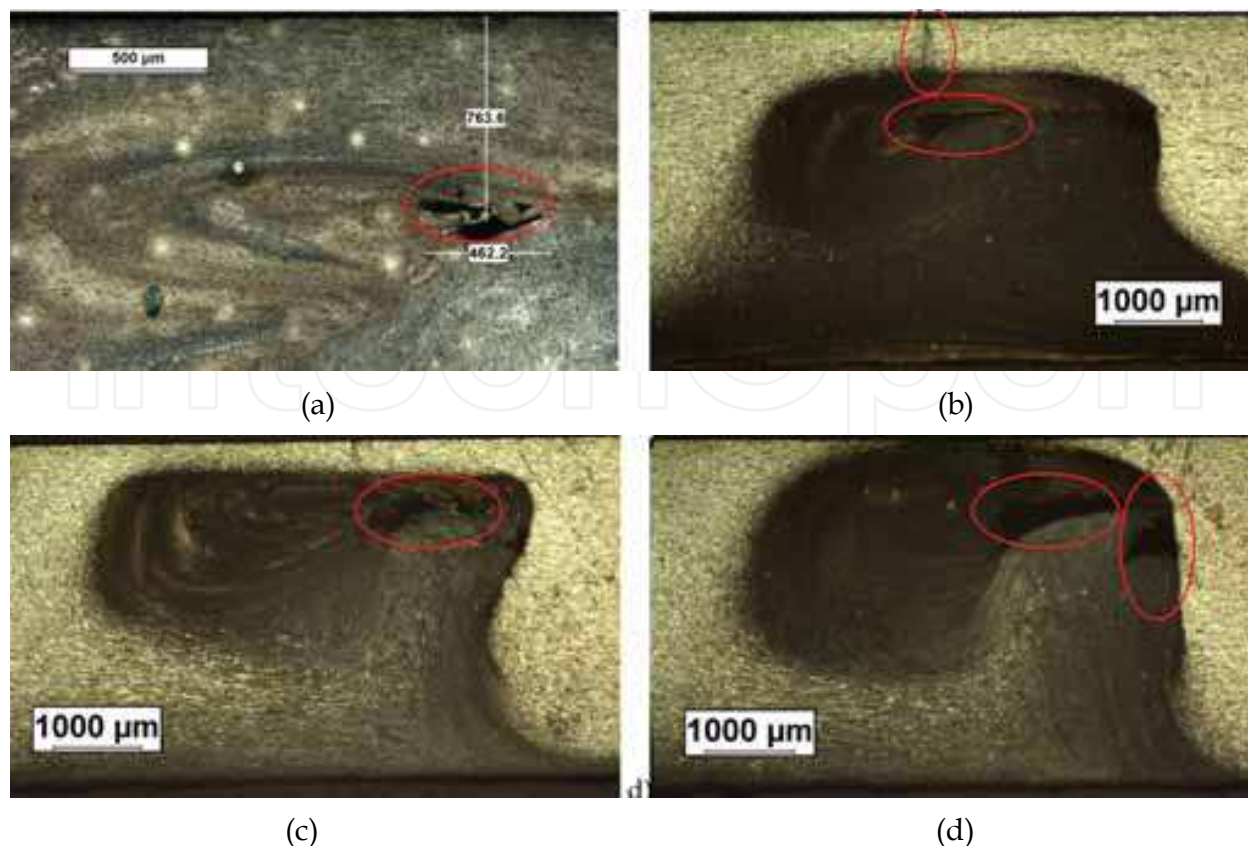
Macrographs of four different FSW void and root defects conditions on AA2024-T4 a) FSW with defect Type III using tool # 2), b) FSW with defect Type M using tool # 4), c) FSW with defect Type M using tool # 6), d) FSW with defect Type M using tool # 7).
